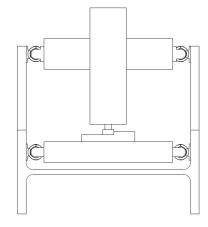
Bed structure with two movable cross-tables: top milling spindle; bottom workpiece holder
